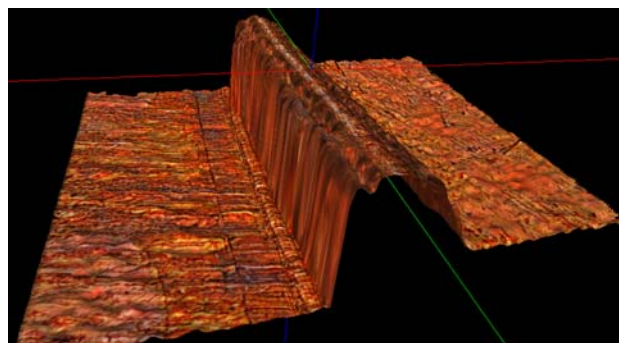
3D image of a section of the extruded copper ring. The section is 450 µm high and 200 µm thick
